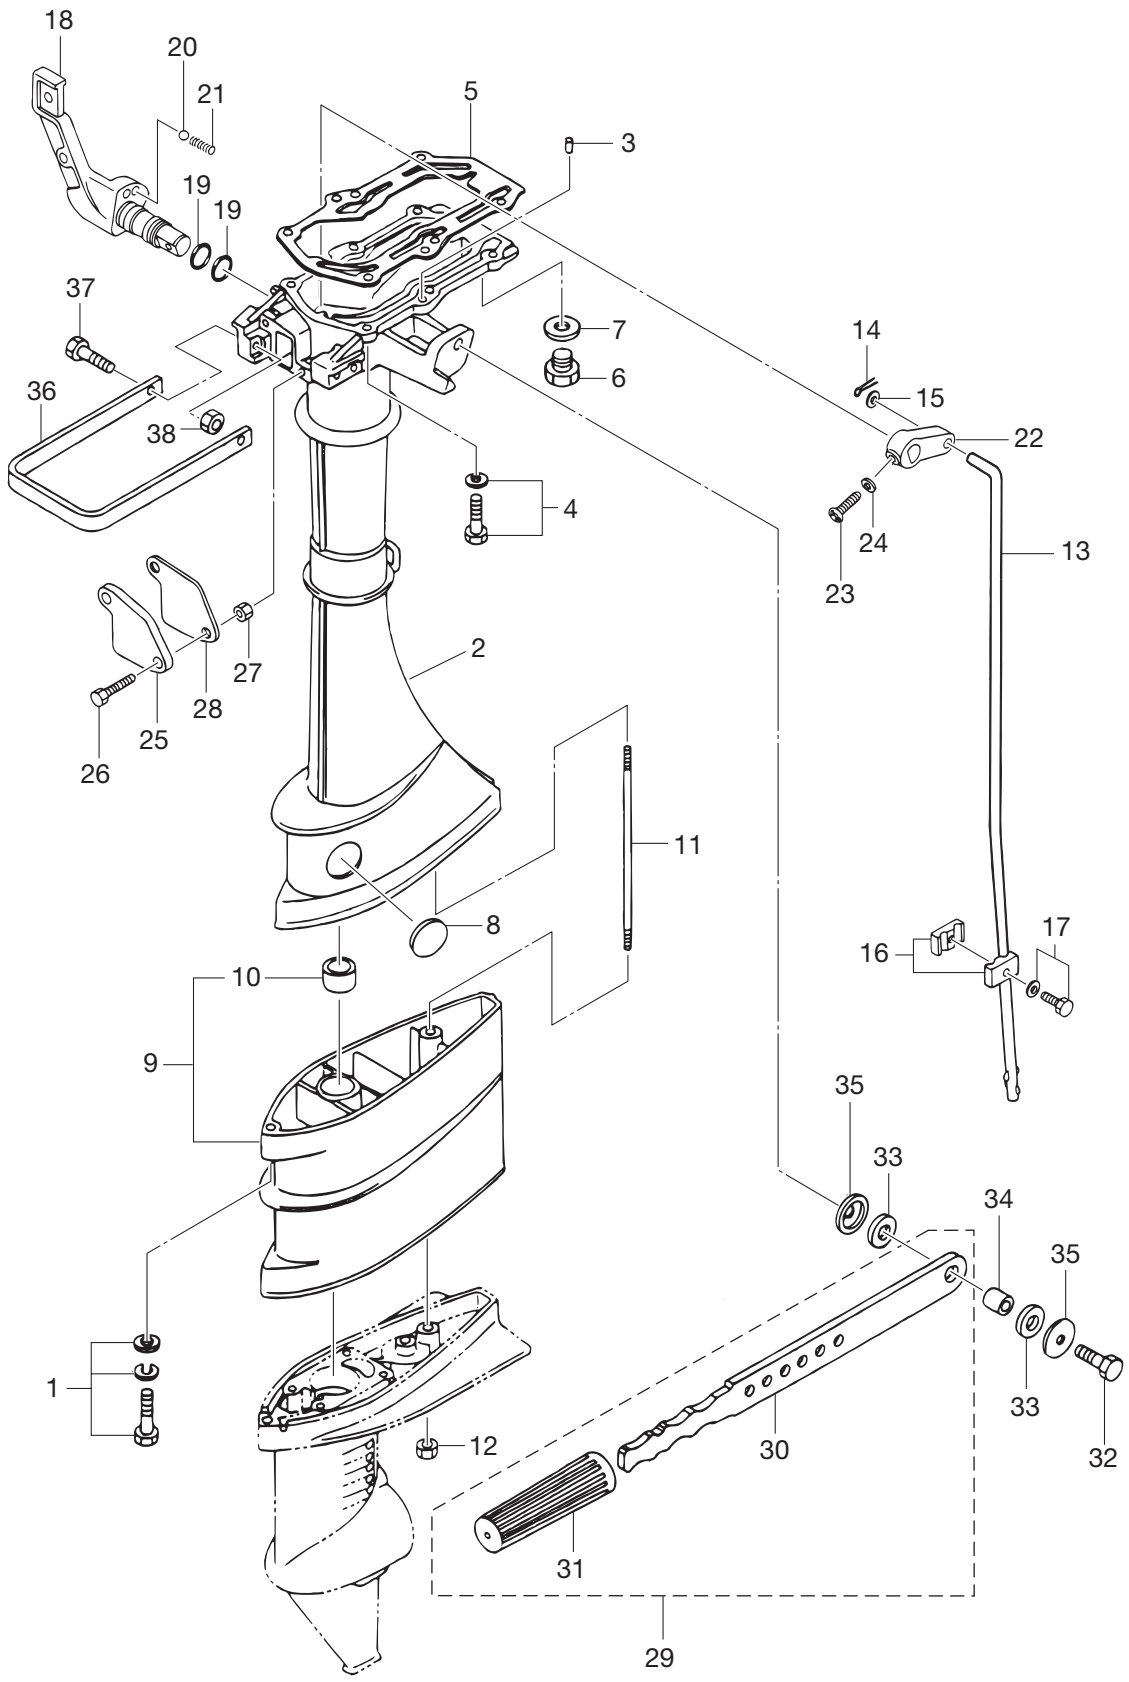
DRIVE SHAFT HOUSING · TILLER HANDLE (M3.5B2)
